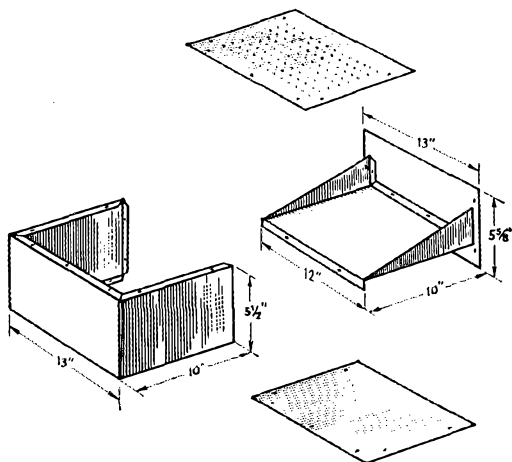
Exploded view of the homemade chassis and cabinet used by K5BUQ. The chassis, front panel, and top and bottom plates are 0.051-inch aluminum, and the back cover on the left is 0.040-inch stock.
